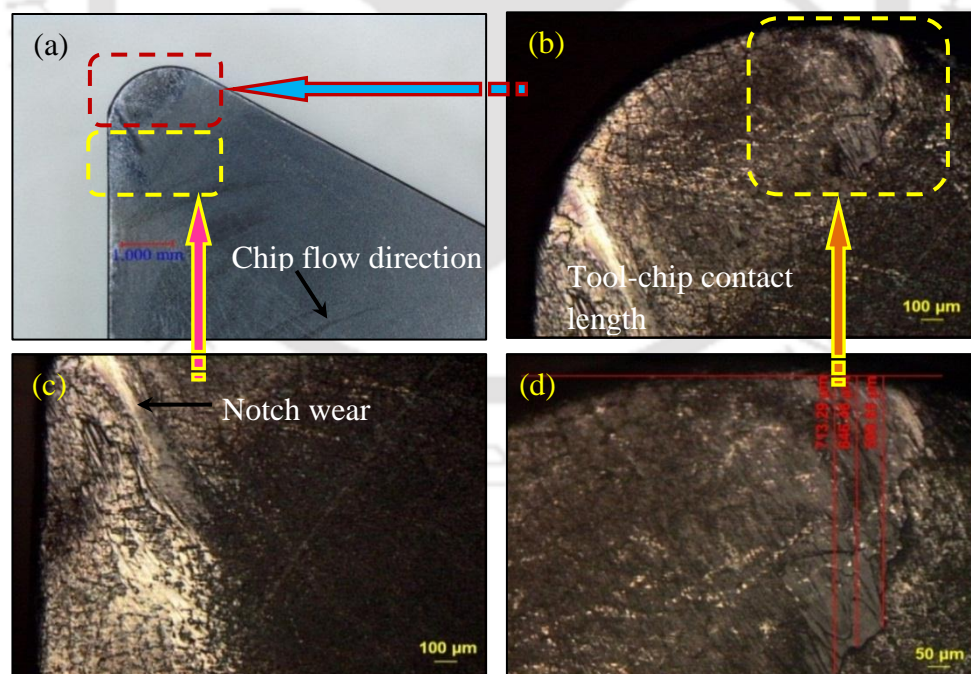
Surface morphology of rake surface of un-textured cutting tool showing (a) adhesion and abrasion wear region, (b) tool-chip contact length region, (c) formation of notch wear and (d) tool-chip contact length measurement after 900 seconds of machining
